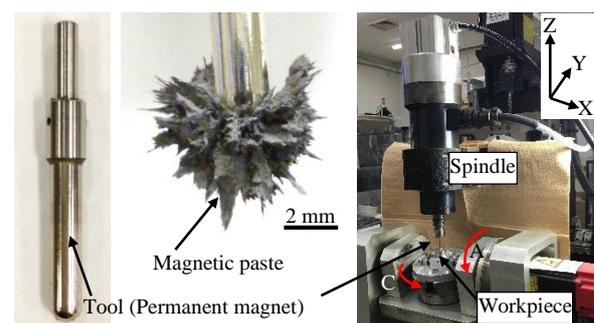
Magnetic polishing tool and paste, 5-axis machining center.
